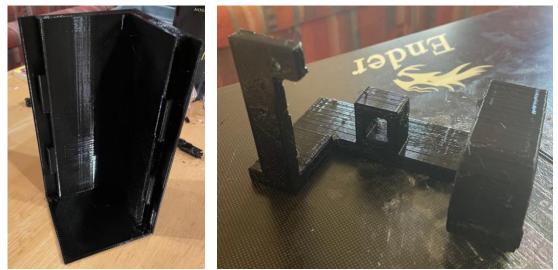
Electronics Housing and Motor Mount for Automatic Sanitizing Spray
